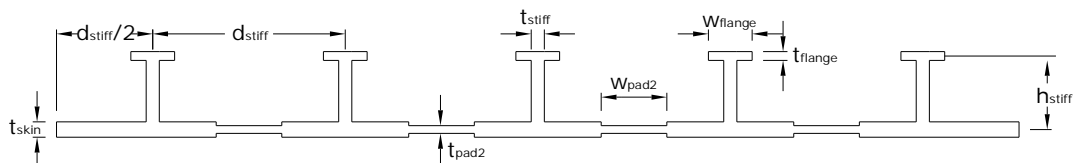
T shaped stiffened plate and pads between stiffeners
